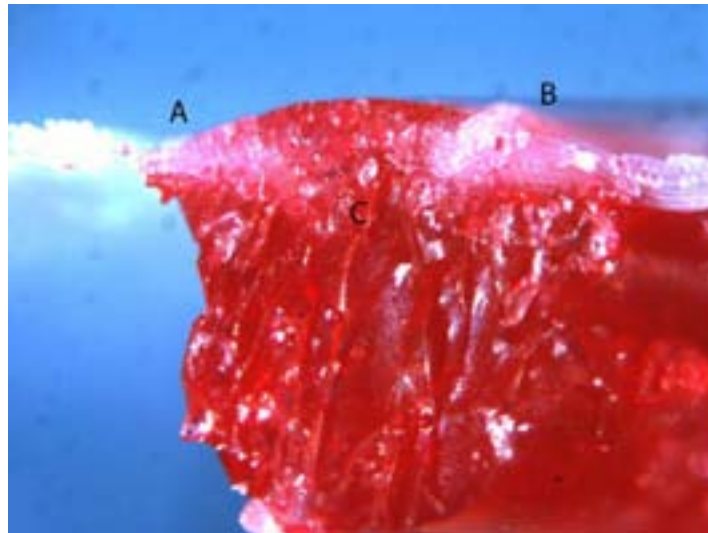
Cross section of sample C4 (fabric at top, sintered layers below).
